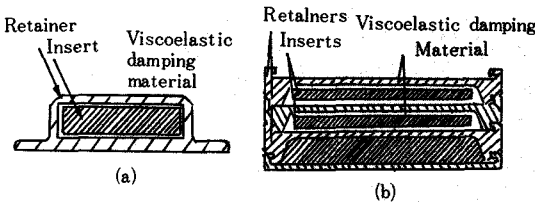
Strip damper cross-sections for (a) single insert design, and (b) interlocking multi-insert design (6)
